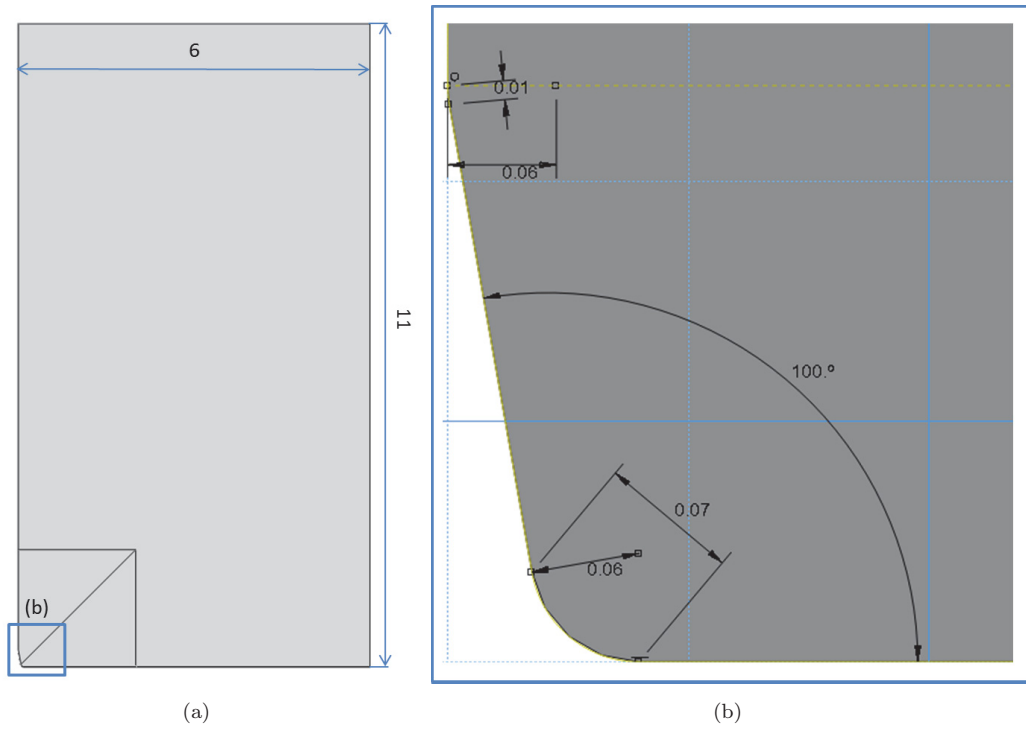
a) Geometry of the tool. b) Tip of the tool's cutting edge.
